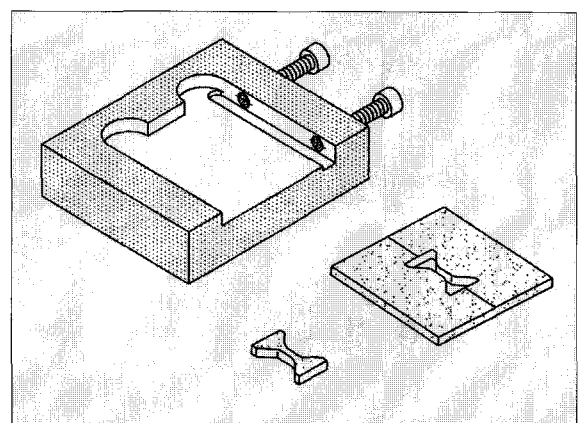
Schematic diagram of mold and device to fabricate the specimen.
